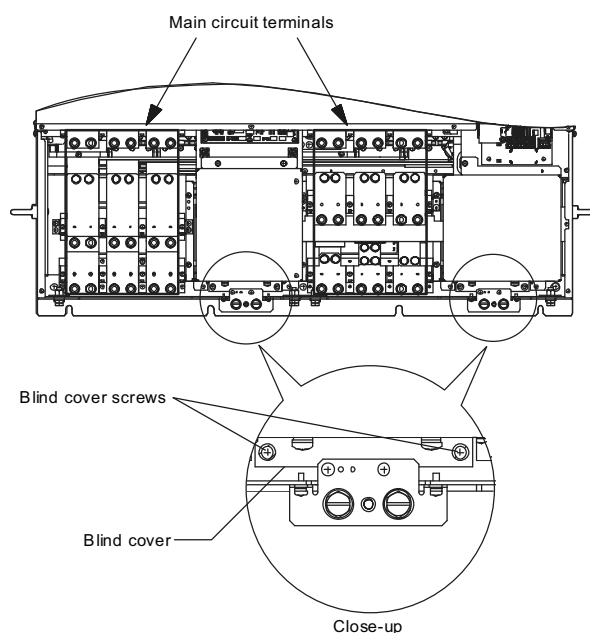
Air Filter Replacement: Removing the Blind Cover
